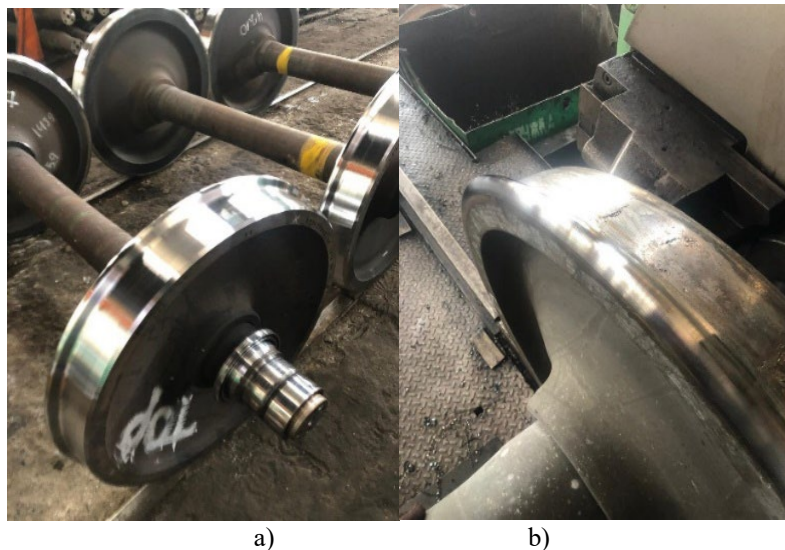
a) Surface roughness of the Wheelset After Machining; b) Surface roughness of the Wheelset Before Machining.
